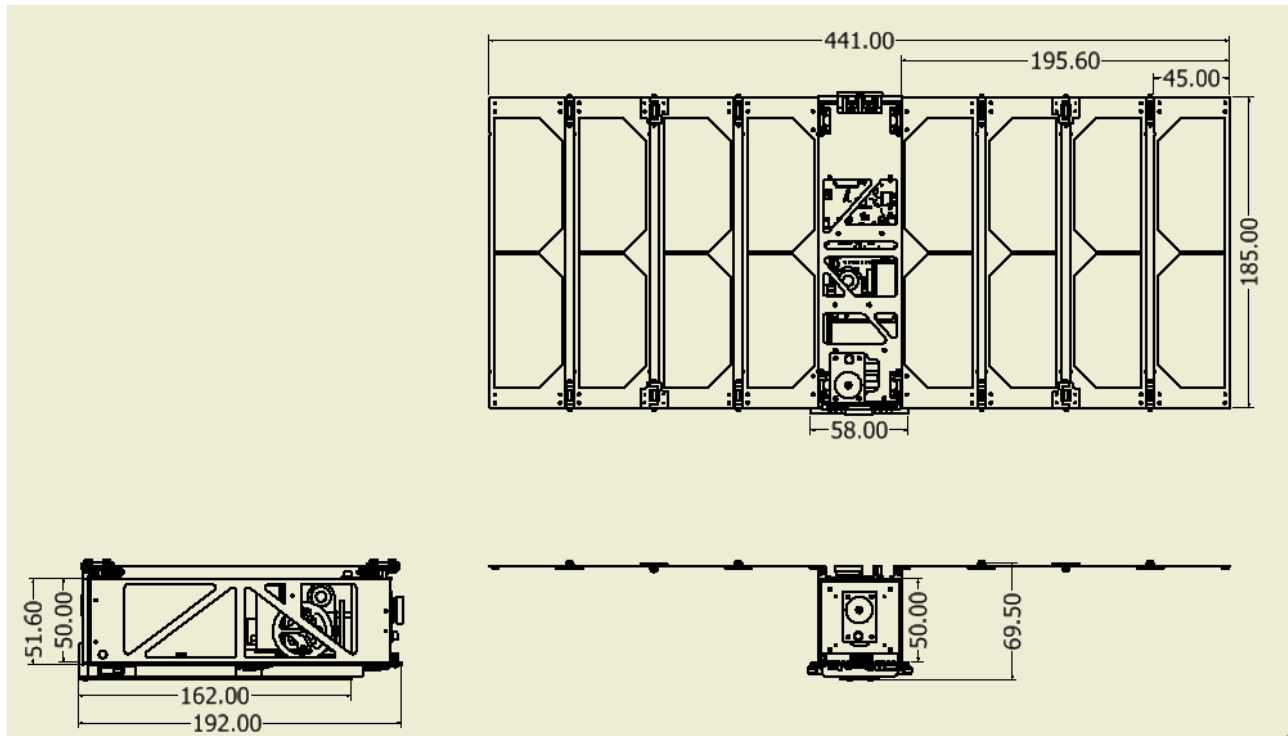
A Noor-1 Unit, Dimension Drawing Solar Panels Deployed
